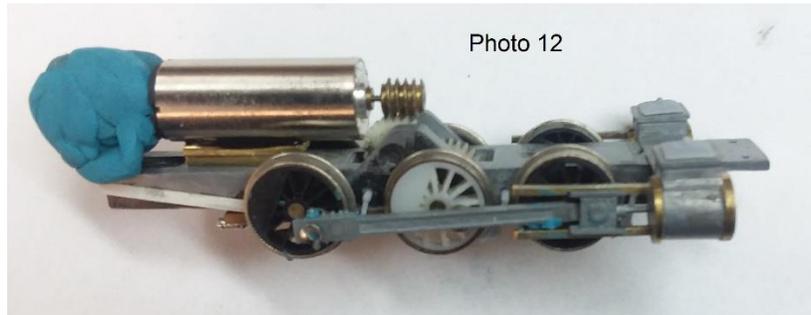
shows the finished drive. Note the lump of modeling clay holding the motor in position while the E6000 adhesive cures. I have used a drive similar to this one in two other MDC locomotives and they perform well.
